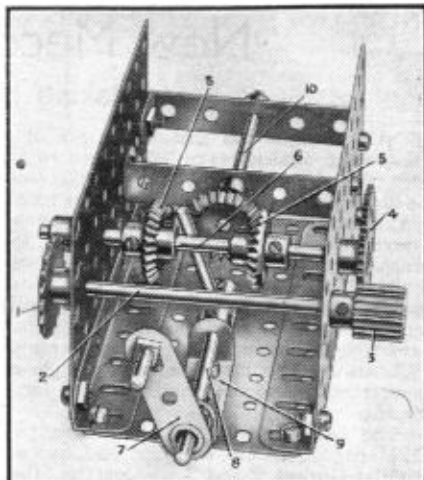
Another example of the use of Bevel Gears. Here three of these parts are used to form a drive reversing mechanism.
